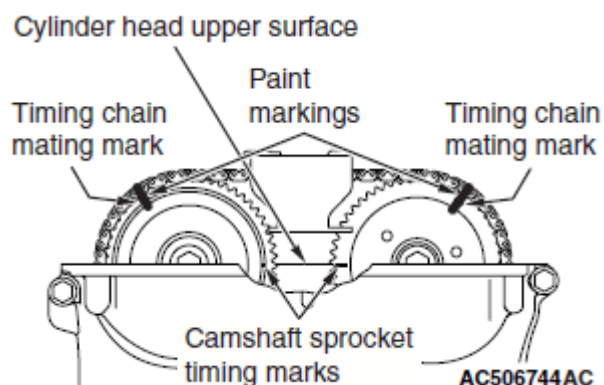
Identifying Camshaft Sprocket Timing Chain Mating Mark
